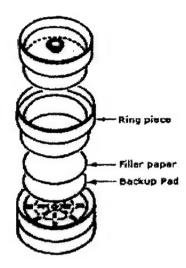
Exploded view of three-piece cassette. Shows correct placement of back-up pad
